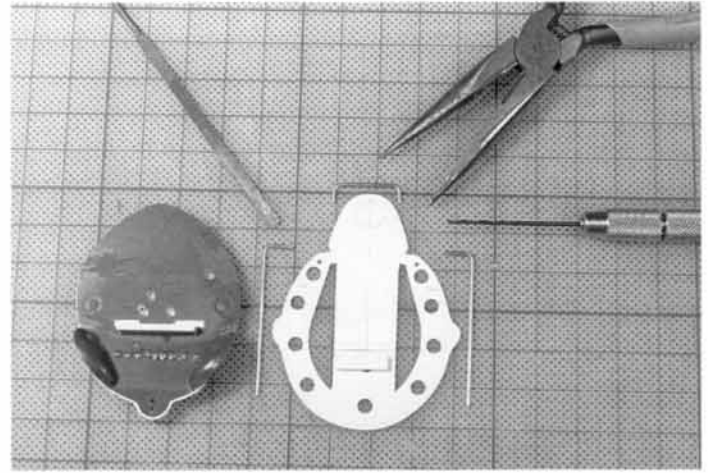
The seat frame bars are all bent to shape and are ready to be installed at the appropriate time in the assembly sequence.
